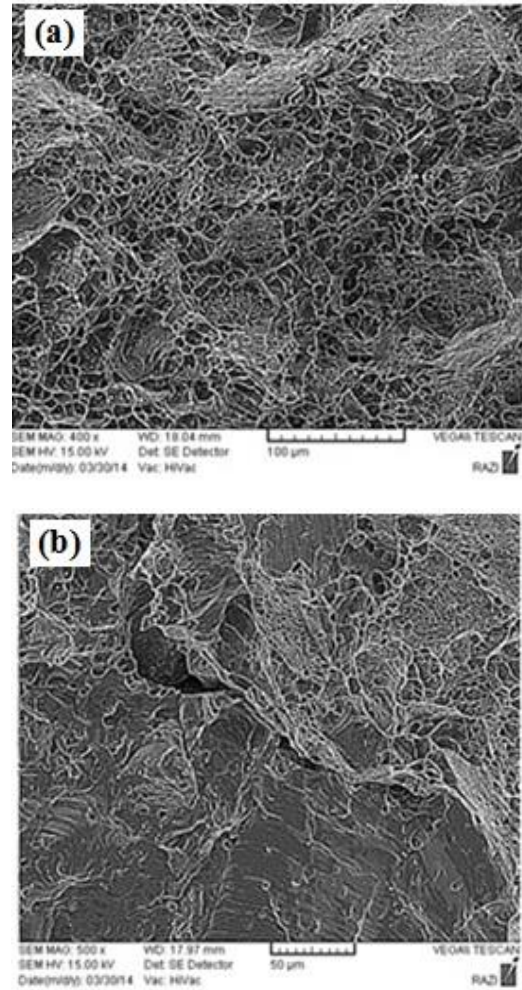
SEM images of the fatigue fracture surface of the Al-6063 alloy tested in (a) air environment, (b) seawater environment.
